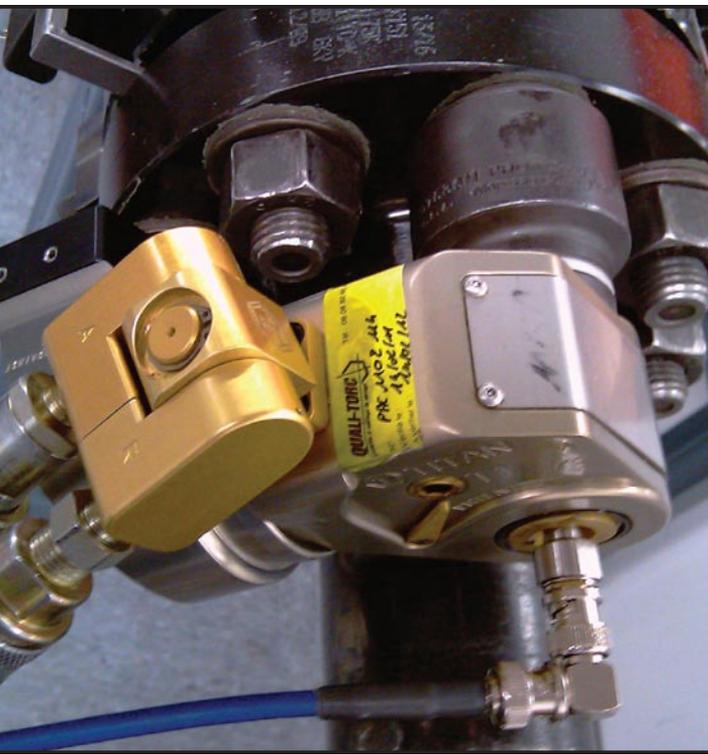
Load controlled tightening using a hydraulic wrench for wind turbine bolt assembly.
